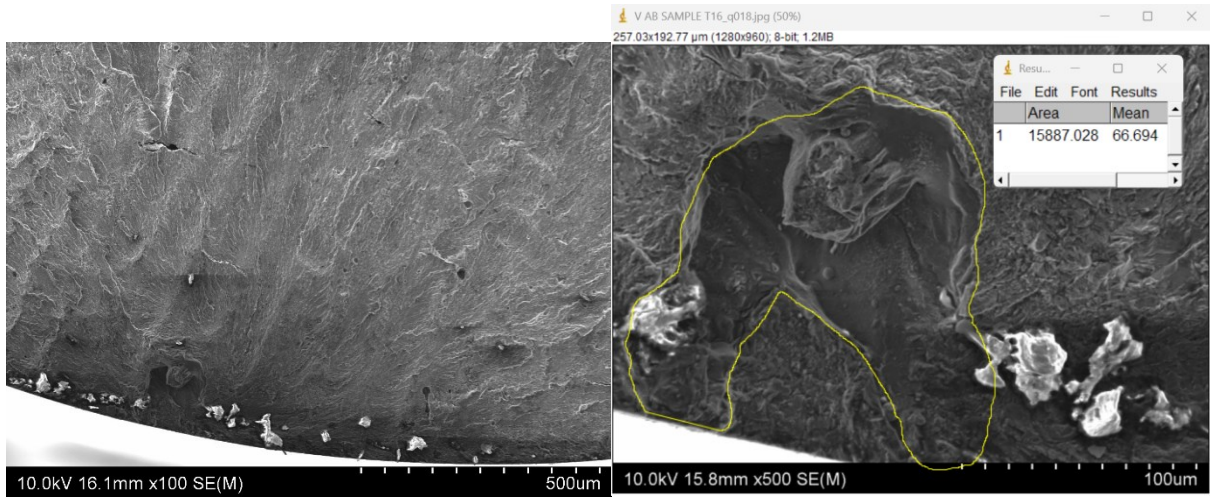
Fracture surface of sample CD_LBD-AB-5 a) x100, b) x400.
